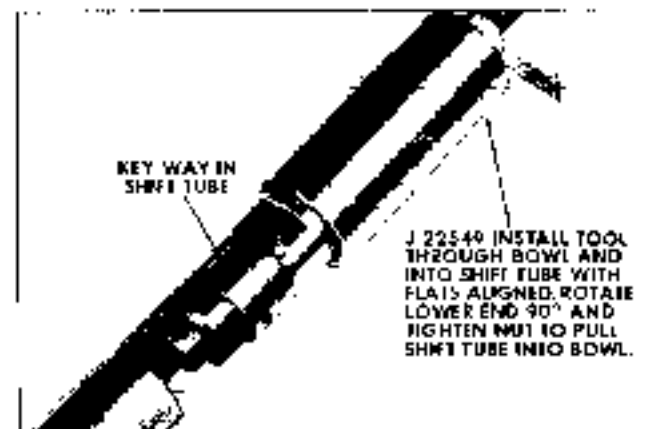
Installing Tool J 22549 into Shift Tube
